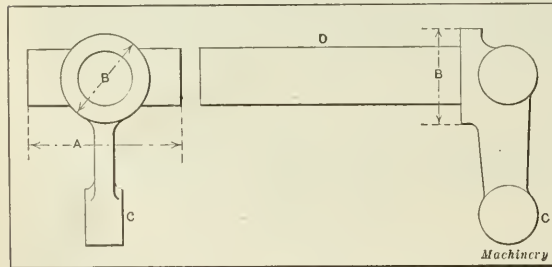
Rectangular Bar that is rough-forged with Steam Hammer
